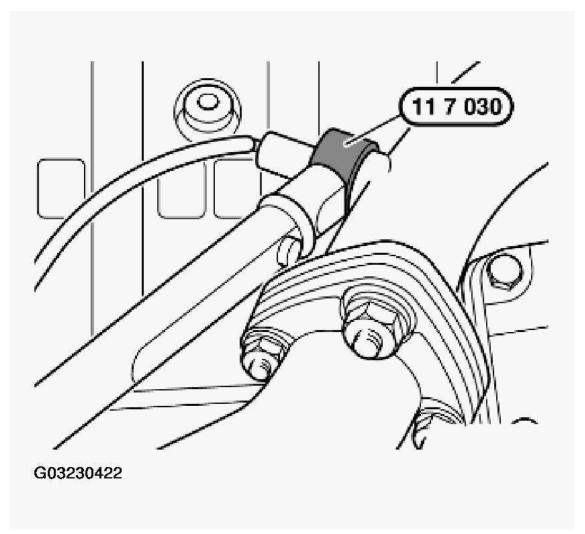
Identifying Socket Wrench Socket WAF 22 Courtesy of BMW OF NORTH AMERICA, INC.
